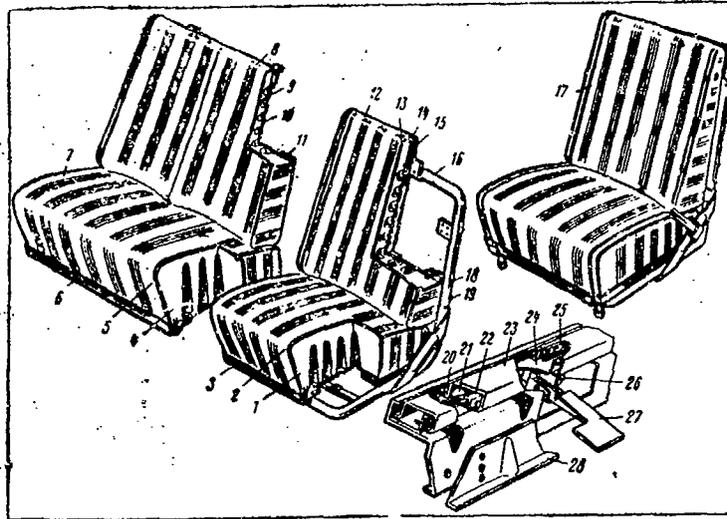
Seats of ZIL-130 and ZIL-131: 1, 4, 10 and 14, foam rubber; 2, 5, 9 and 13, covering; 3 and 6, edging; 7, passenger seat bottom; 8, passenger's seat back; 11 and 15, frames; 12, driver's seat back; 16, back holder; 17, driver's seat assembled; 18 and 19, screws for adjustment of back position; 20 and 21, balls; 22, ball separator; 23, moving guide; 24, non-moving guide; 25, vertical slots in moving guide; 26, stop mechanism axis; 27, longitudinal seat adjustment stop lever; 28, bracket fastening seat to floor of cabin
